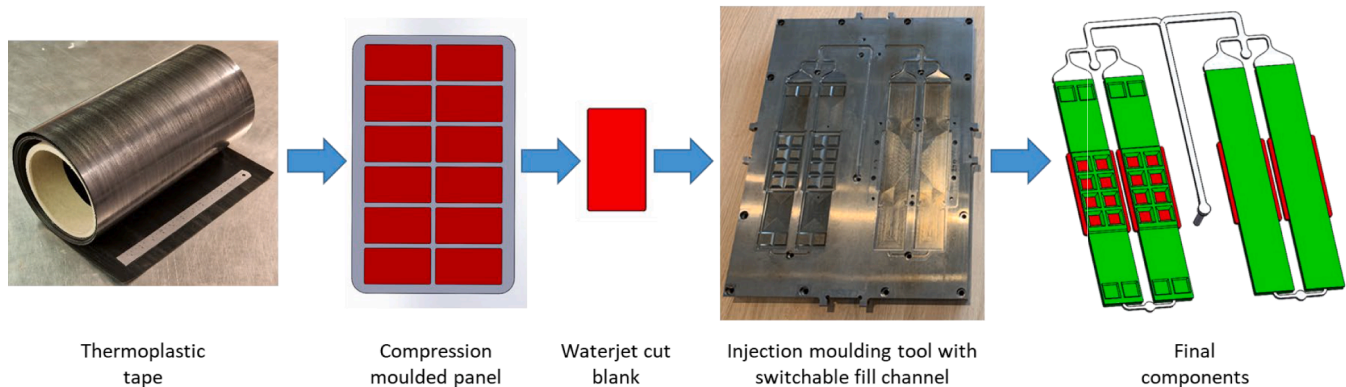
Schematic of the process followed for the production of the physical test specimens with Bias and Waffle insert positions, using injection overmoulding.
